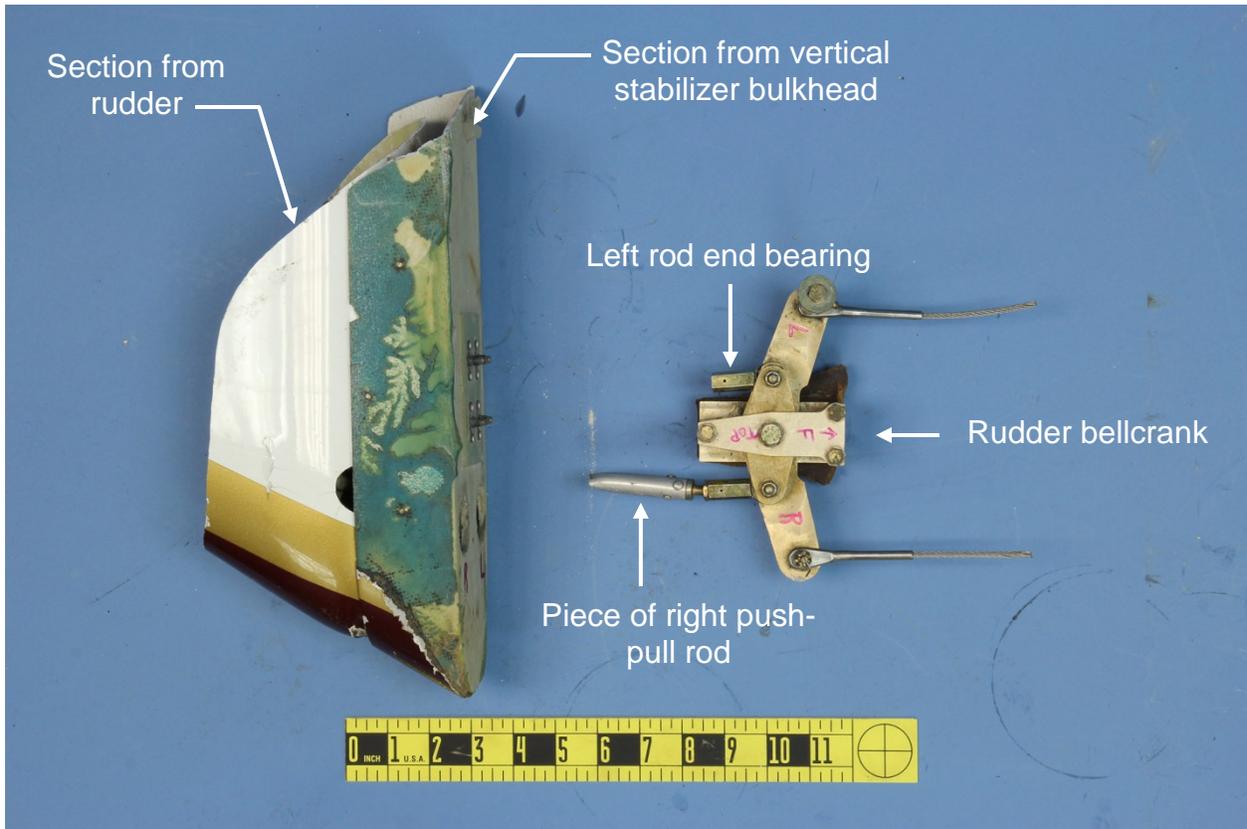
The rudder bellcrank with attached piece of right push-pull rod and section of vertical stabilizer bulkhead/rudder, as-received.
